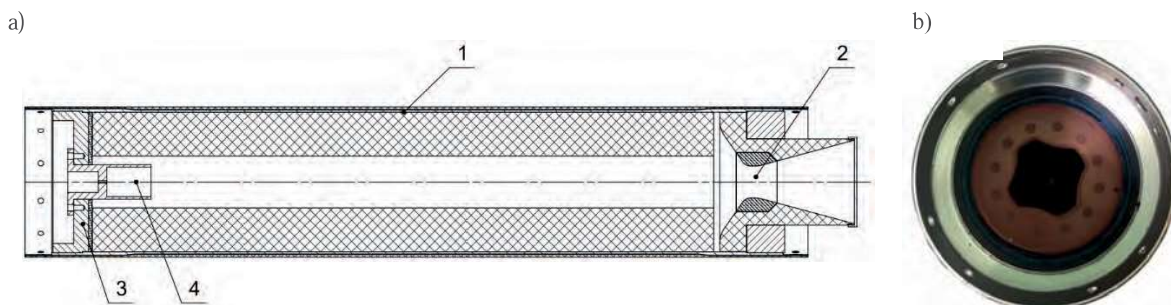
Design of solid rocket motor Syriusz: a) technical drawing, b) view of the SRM
